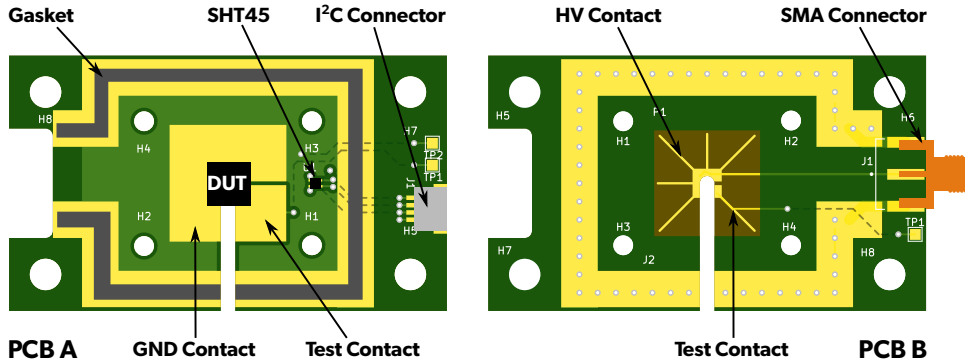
Annotated top layer view of the two PCBs used in the sandwich-type sample holder. PCB A includes temperature and humidity readout via a Sensirion *SHT45* sensor. PCB B shows the specially designed low capacitance contact and the matched $50\ \Omega$ transmission line up to the SMA connector. Figure previously published in [99].
